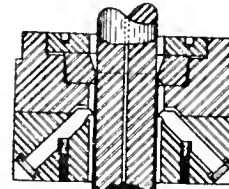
SECTION OF FOURTH DRAW DIE.
